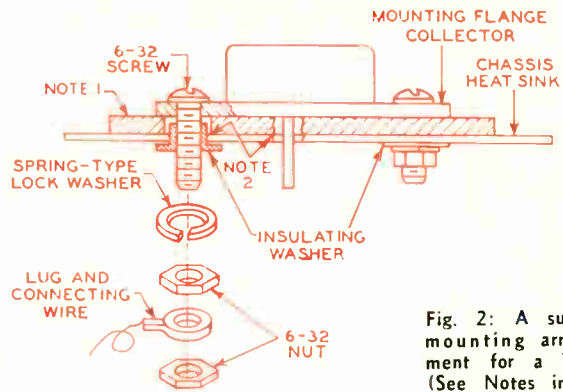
A suitable mounting arrangement for a TO-3. (See Notes in Fig. 1).
